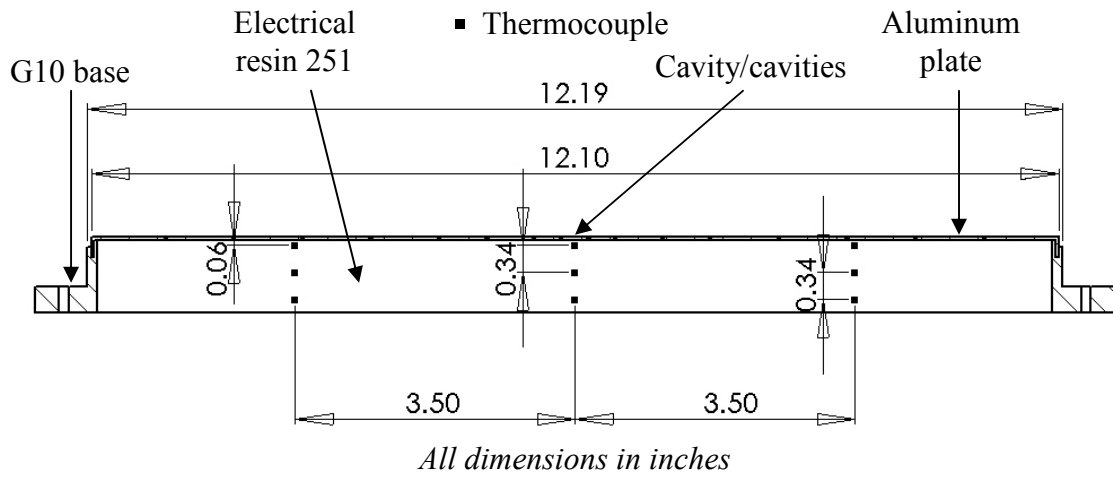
Aluminum test surface assembly and placement of thermocouples at various axial locations.
